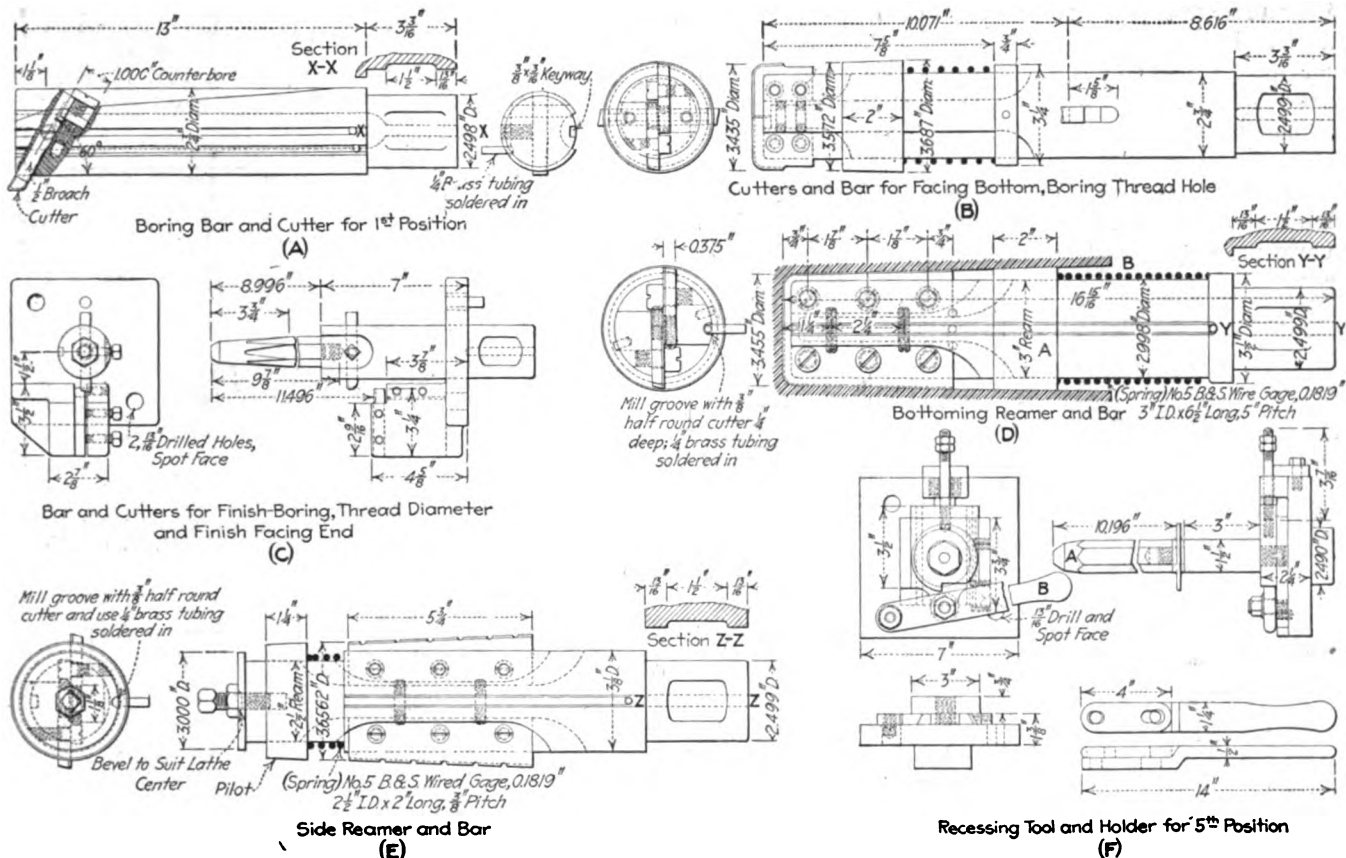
DETAILS OF BORING TOOLS SHOWN IN FIG. 9
